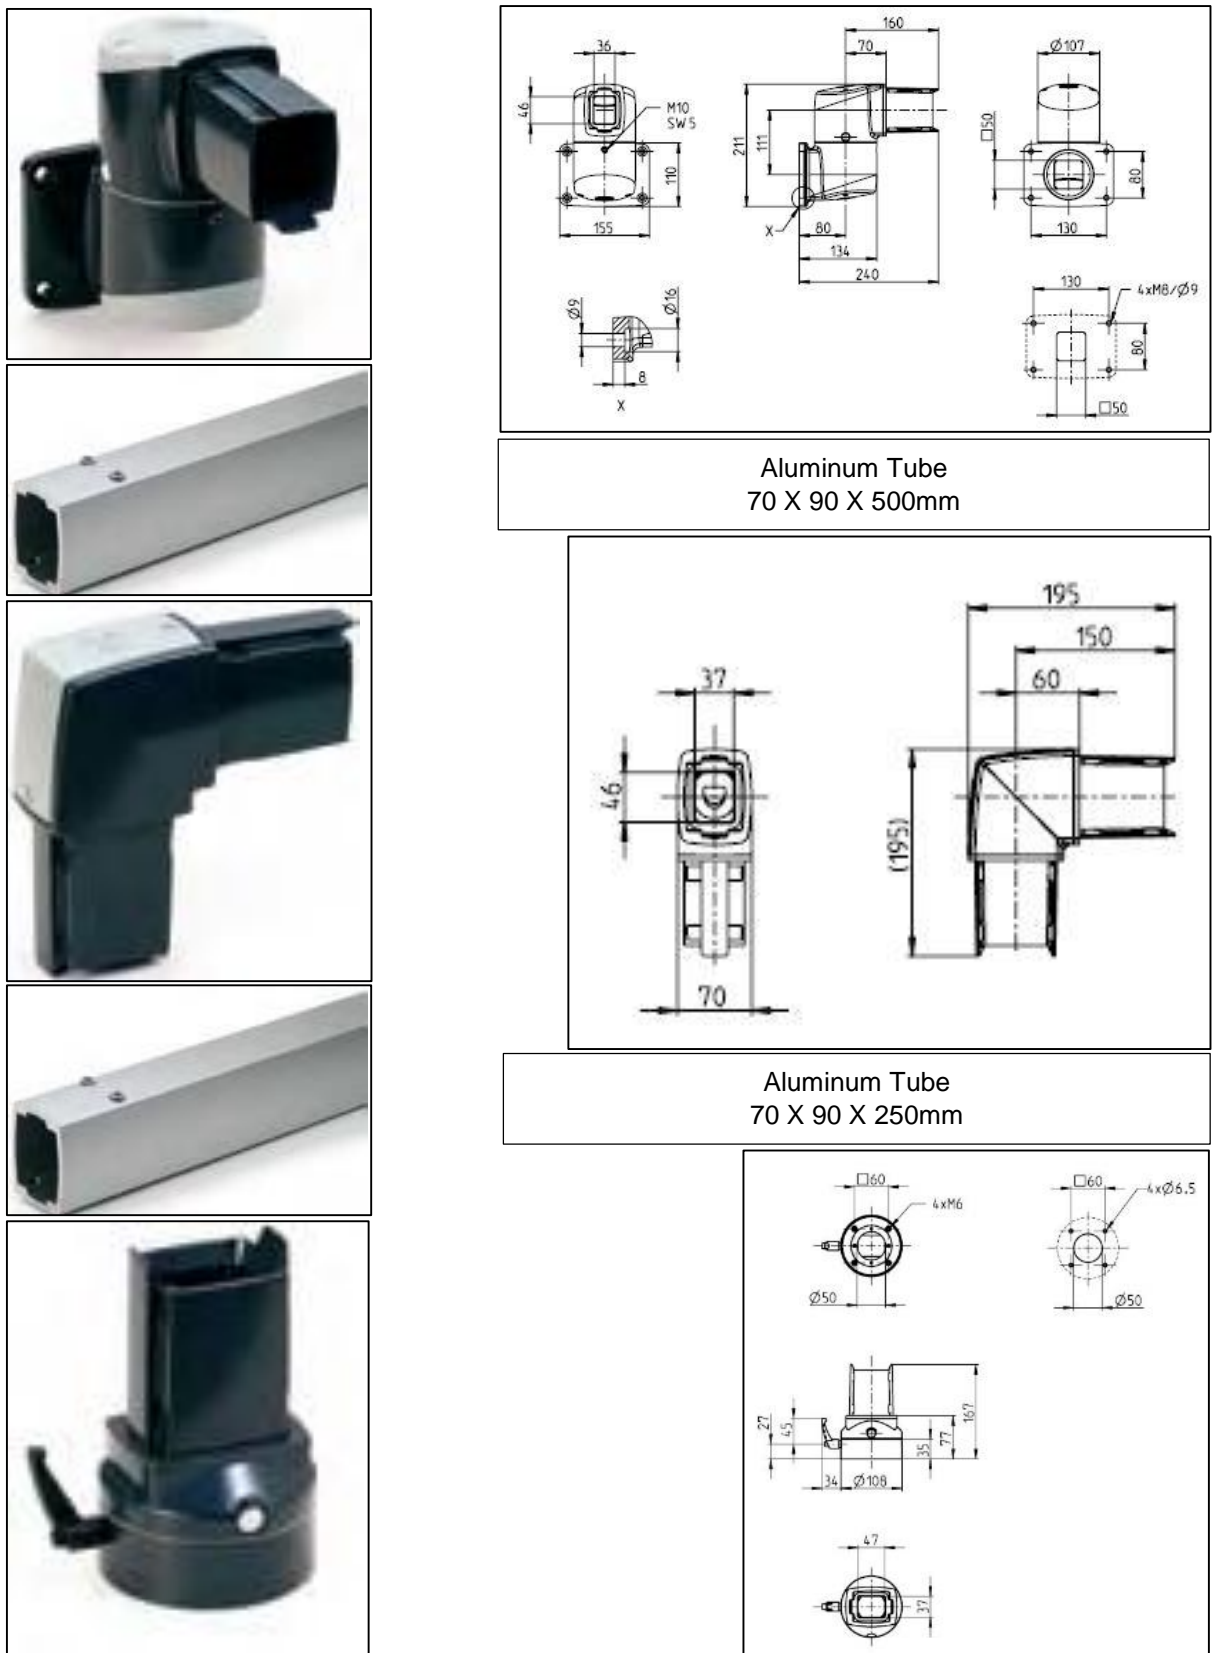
Mounting elements for wall mounted swiveling supporting arm with dimensions
